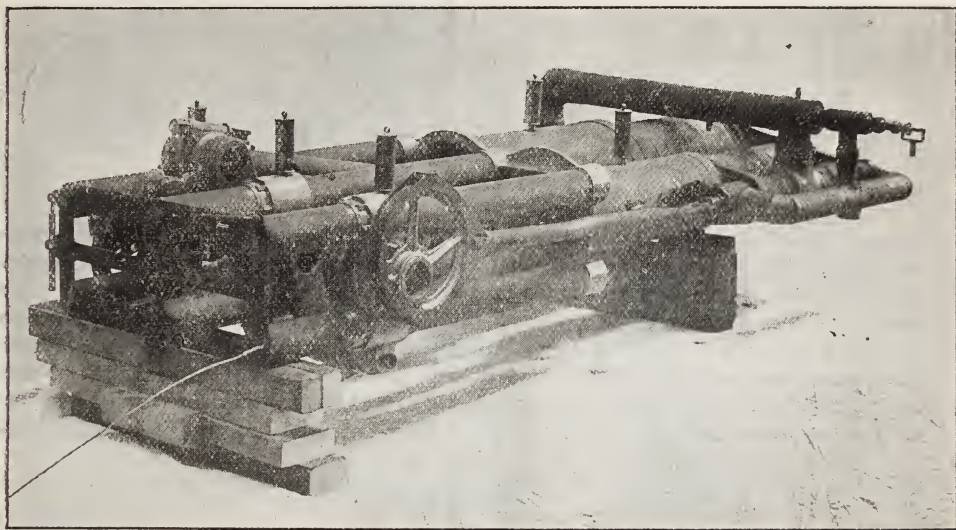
HORIZONTAL SECTION OF THE ENGINE.
